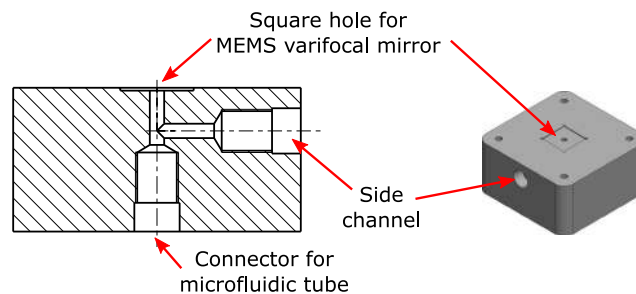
Design of the mirror holder part used to connect the fluidic chamber of the varifocal mirror to the microfluidic tube of the microinjection system. The side channel is used to remove air from the system while filling it with oil.
